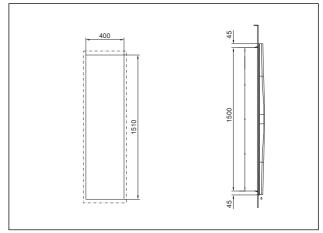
SK 3366.xxx/SK 3377.xxx full internal mounting
